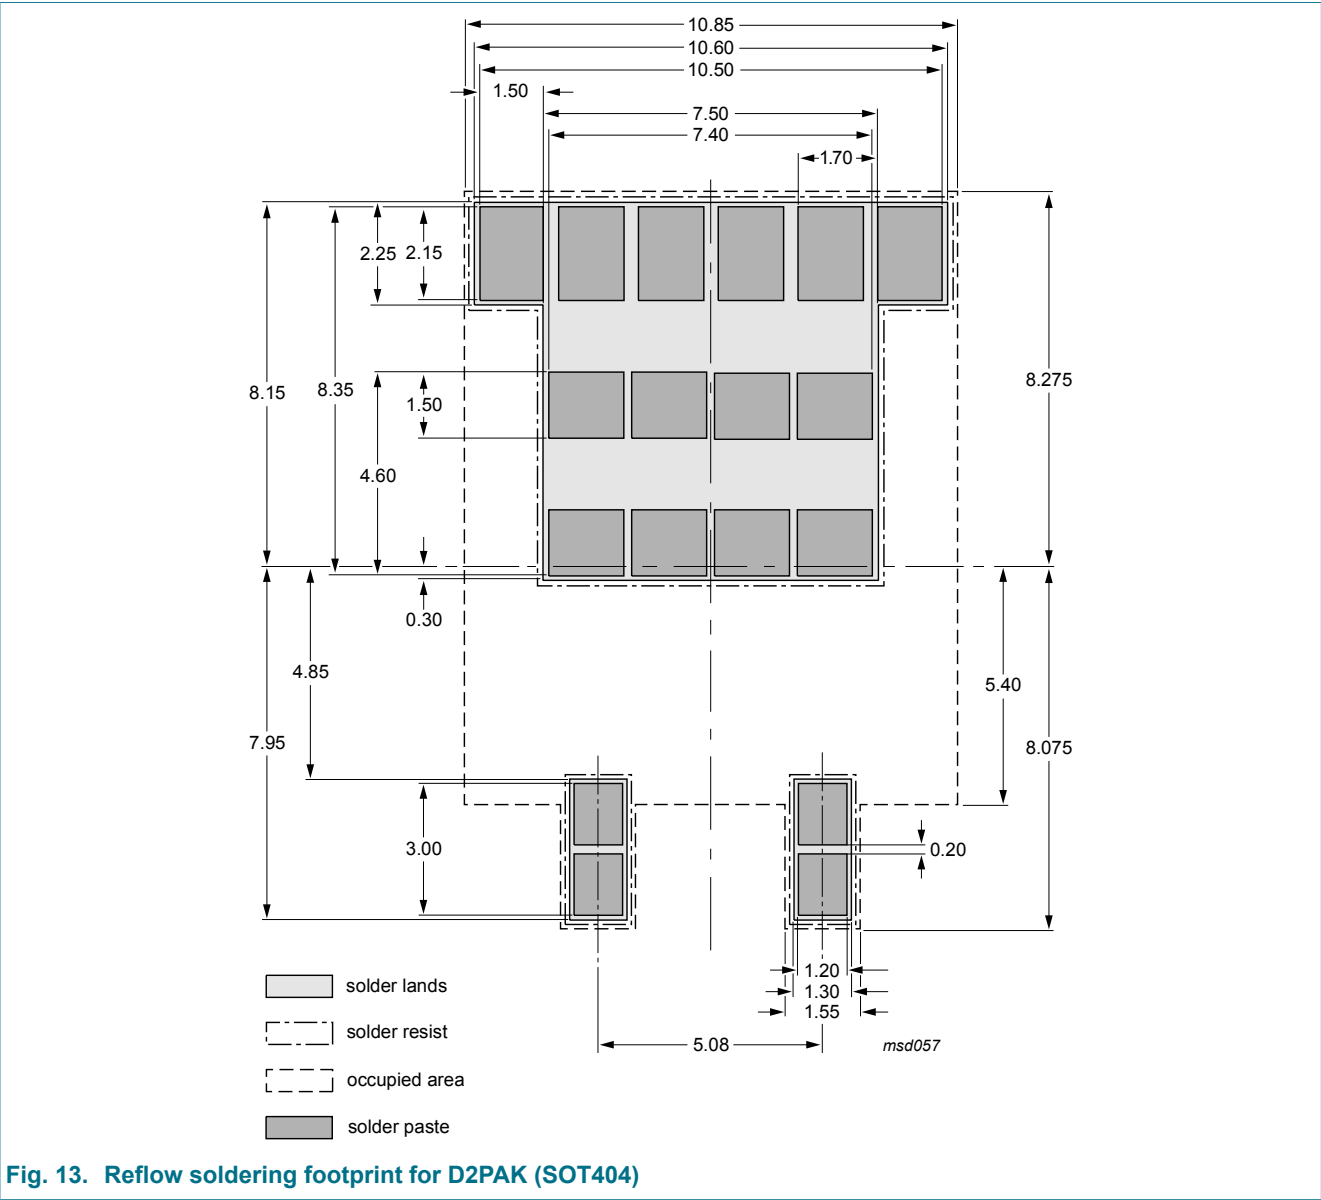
Reflow soldering footprint for D2PAK (SOT404)
